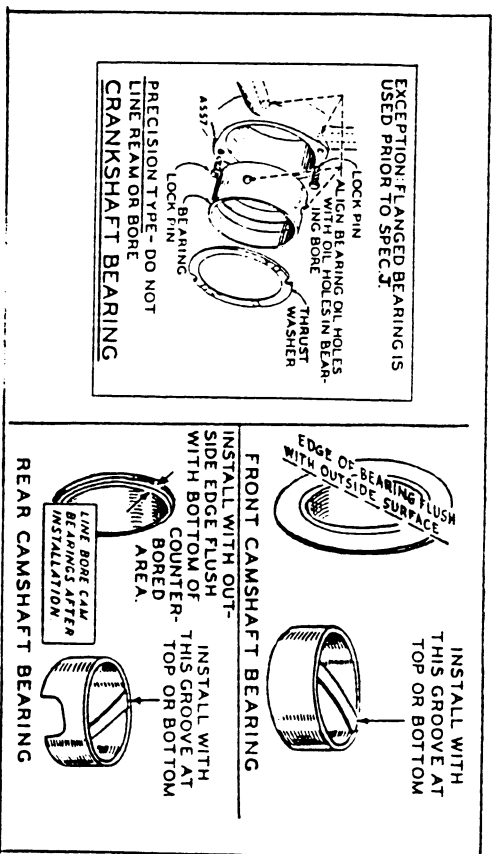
MAIN AND CAMSHAFT BEARINGS
